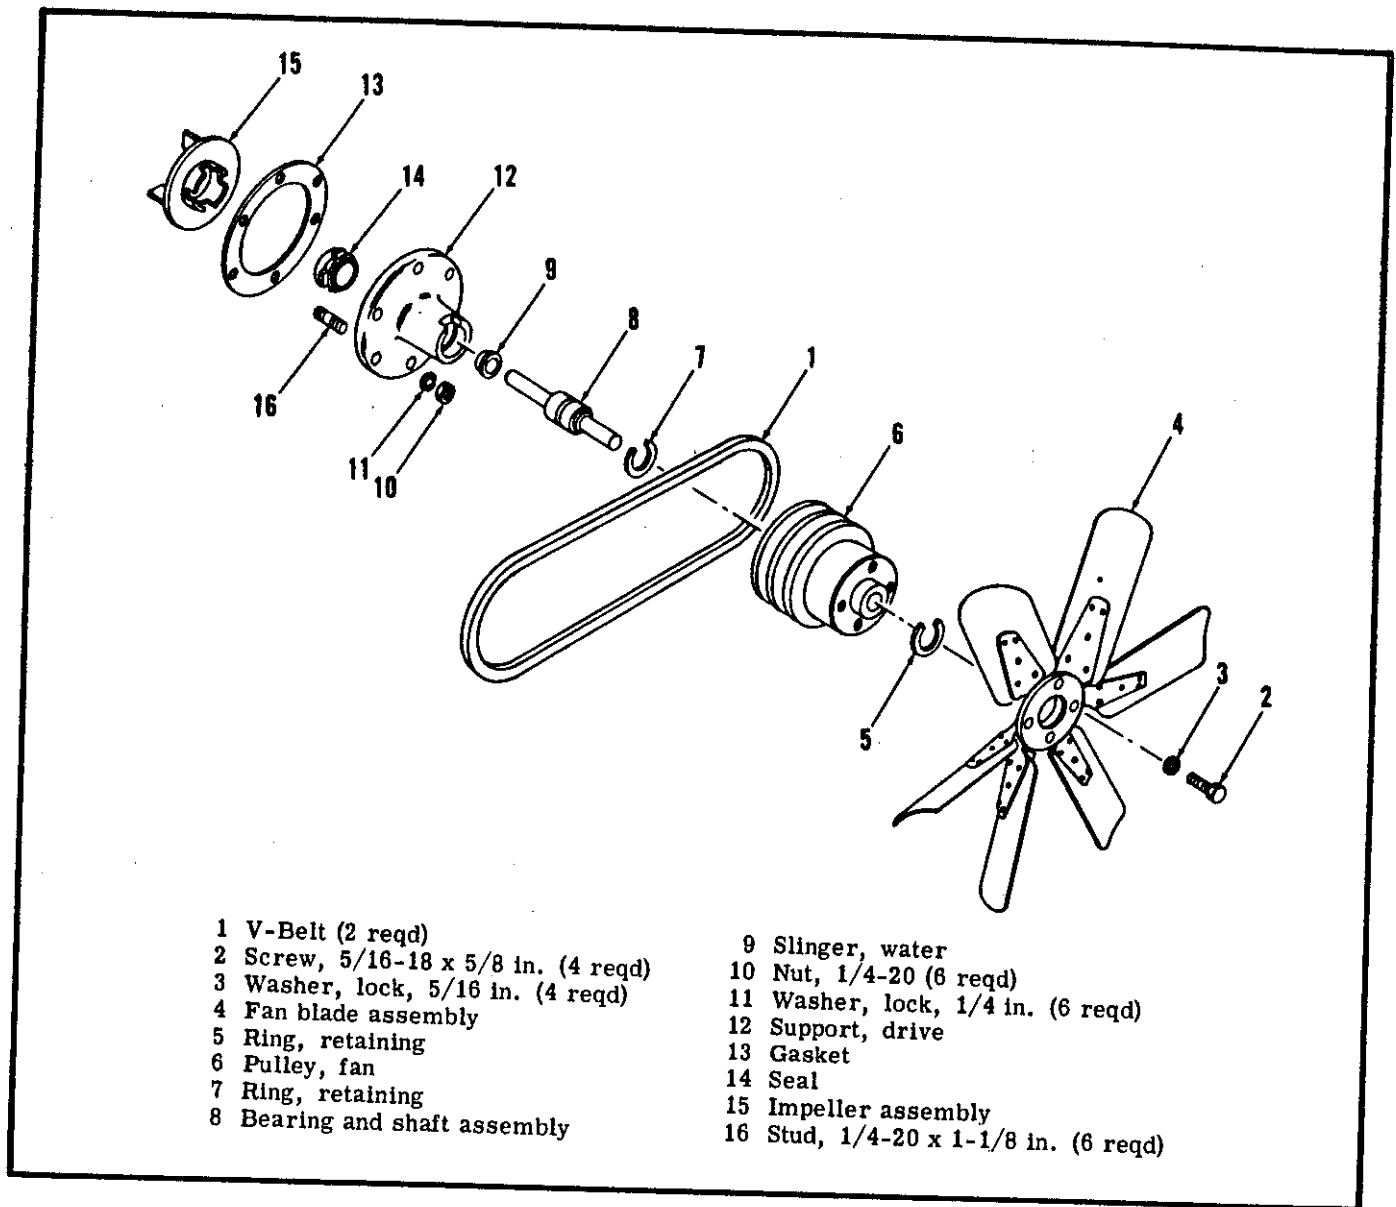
Water Pump and Fan Assembly, Disassembly and Reassembly
